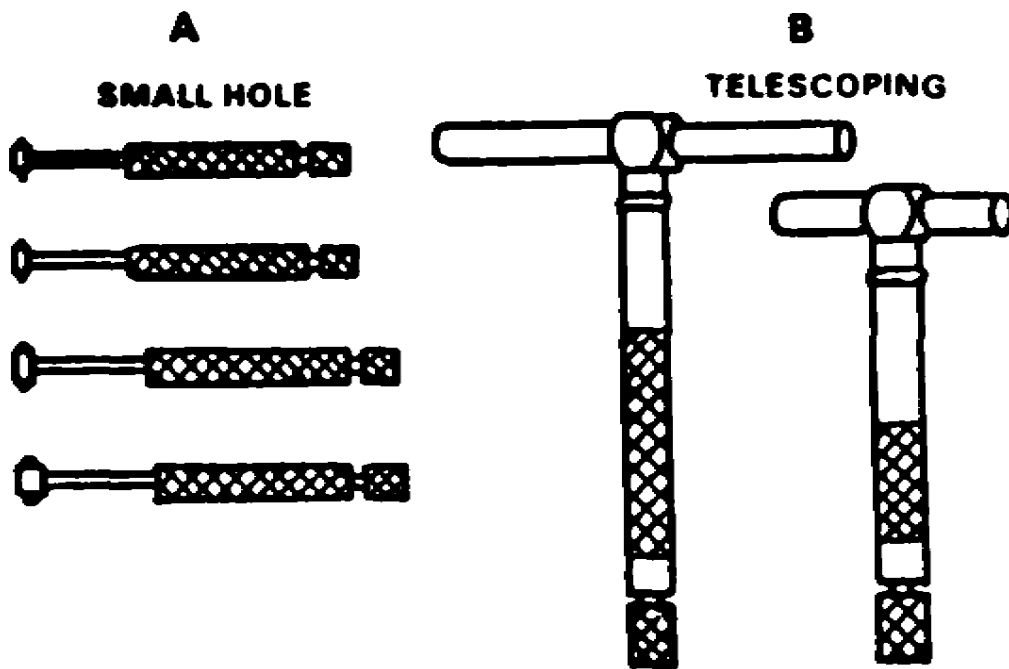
SMALL HOLE AND TELESCOPING GAGES (PARTS A AND B)
